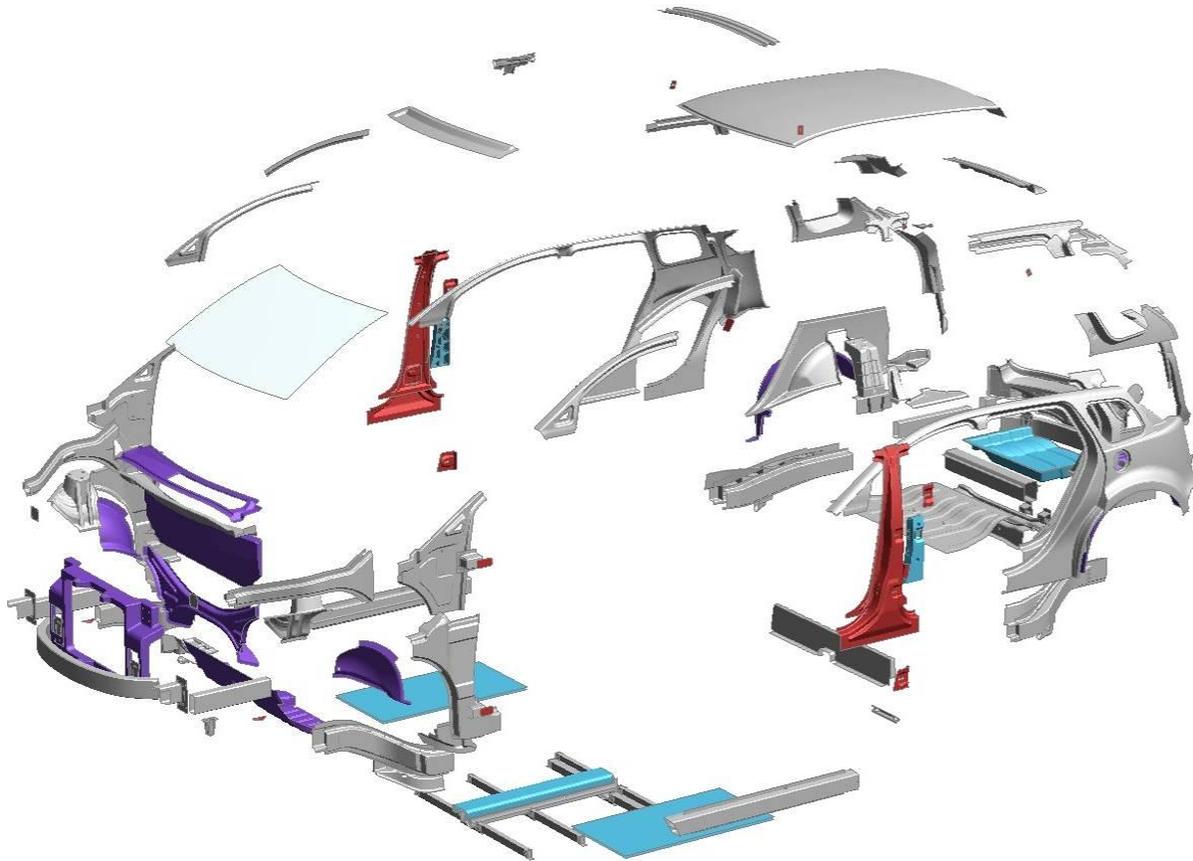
d: Body-in-white Material Usage Exploded View
